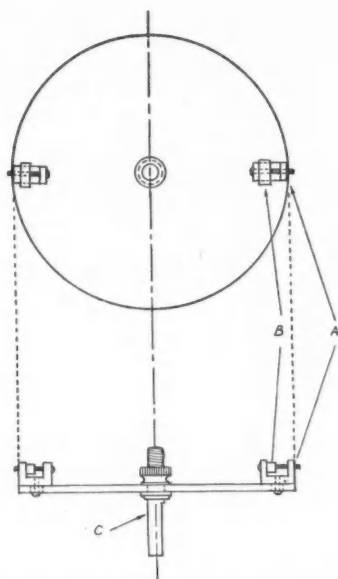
Disk for measuring the acceleration due to gravity: (A) the cradles, (B) the slugs, (C) bolt for attachment to rotor.
